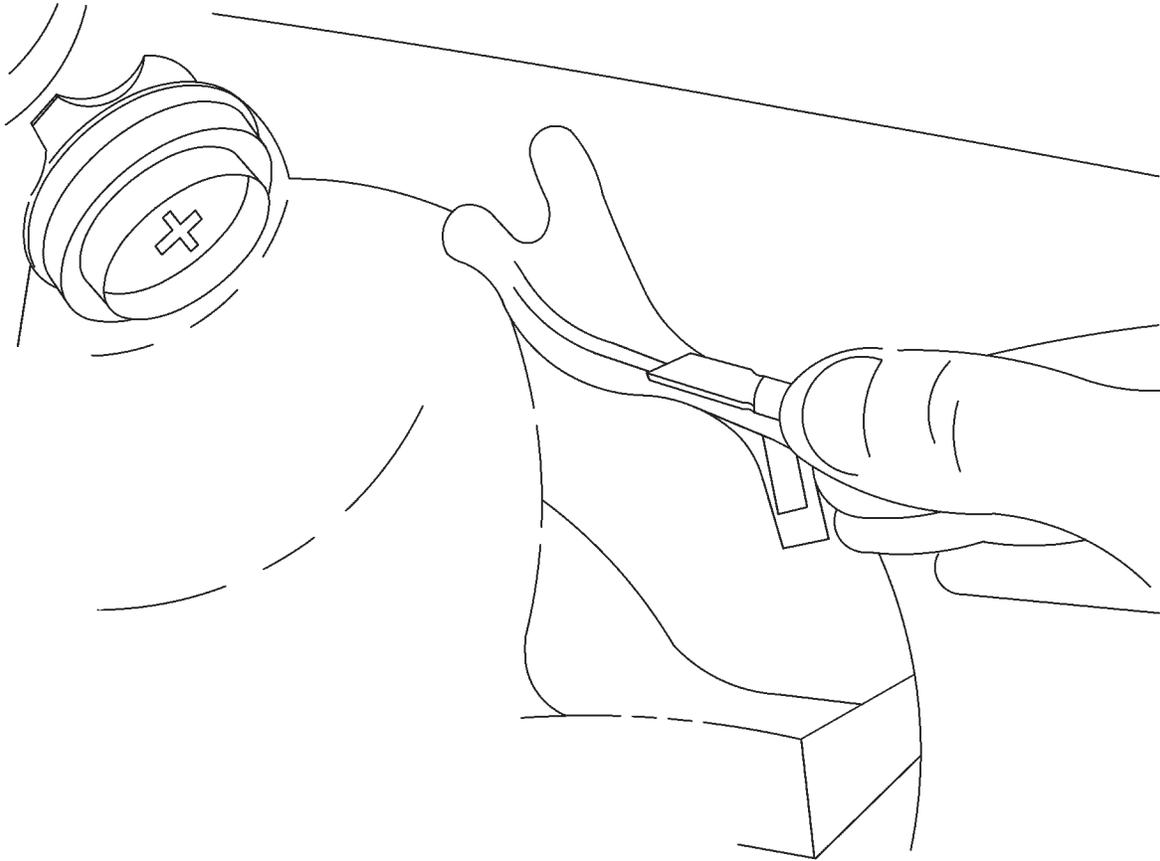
Visor Tang Trimming (Sheet 1 of 4)
